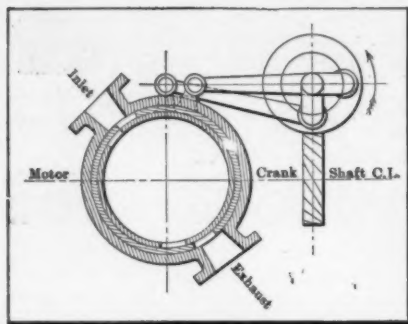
Horizontal section through motor cylinder, showing oscillating double-valve system
